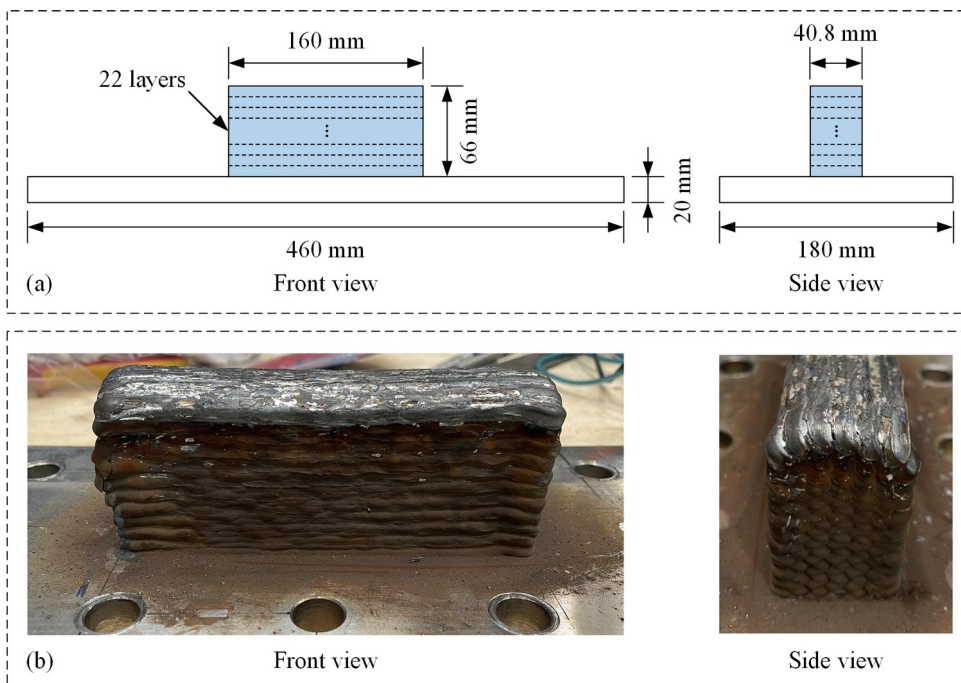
Schematics of: (a) Dimensions [mm] of specimen; and (b) As-deposited component.
